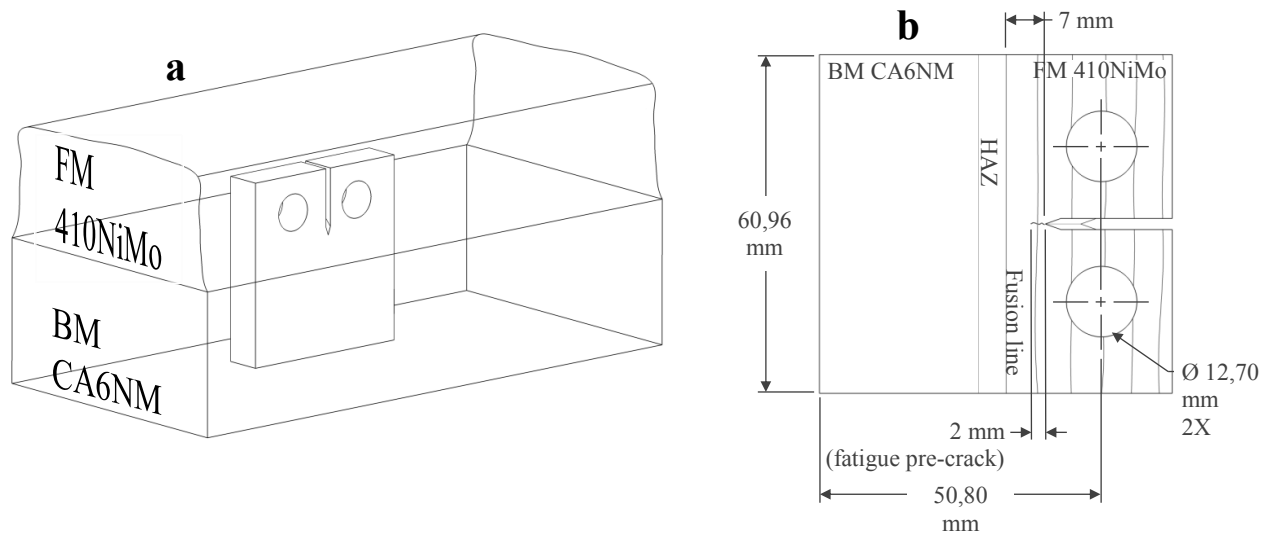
a) CT specimen sampling layout from welded plate. b) CT specimen details. Machined blanks were cut from the welded plate then etched to reveal the FL. Machining was then finalized so that the starter notch at surface was in the FM at 7 mm from the FL.
